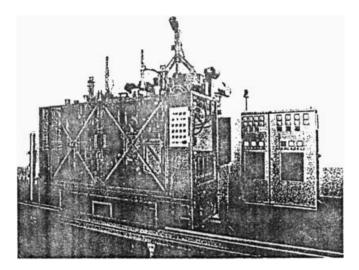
Bekum BM04D continuous extrusion blow molder for the manufacture of biaxially oriented PVC bottles. Production rate for 1-L bottle is 2000 per h; maximum bottle size is 2 L. Courtesy of Bekum Plastic Machinery, Inc.
